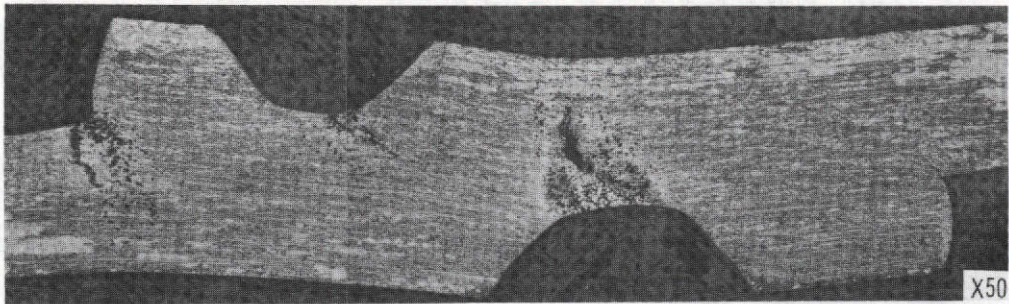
Failure initiation in notched seam welded lap joint in unrecrystallized 0.4-millimeter-thick TD-NiCrAl sheet. Stress-rupture test stopped before complete fracture. Weldments postheated at 1315° C for 2 hours in hydrogen. Stress-rupture test conditions: temperature, 1100° C; stress (weld shear), 9.7 megapascals (1.1 ksi); time of test, 22 hours.
